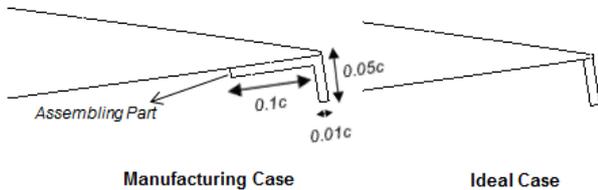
Gurney Flap Geometry For Ideal And Manufactured Case
